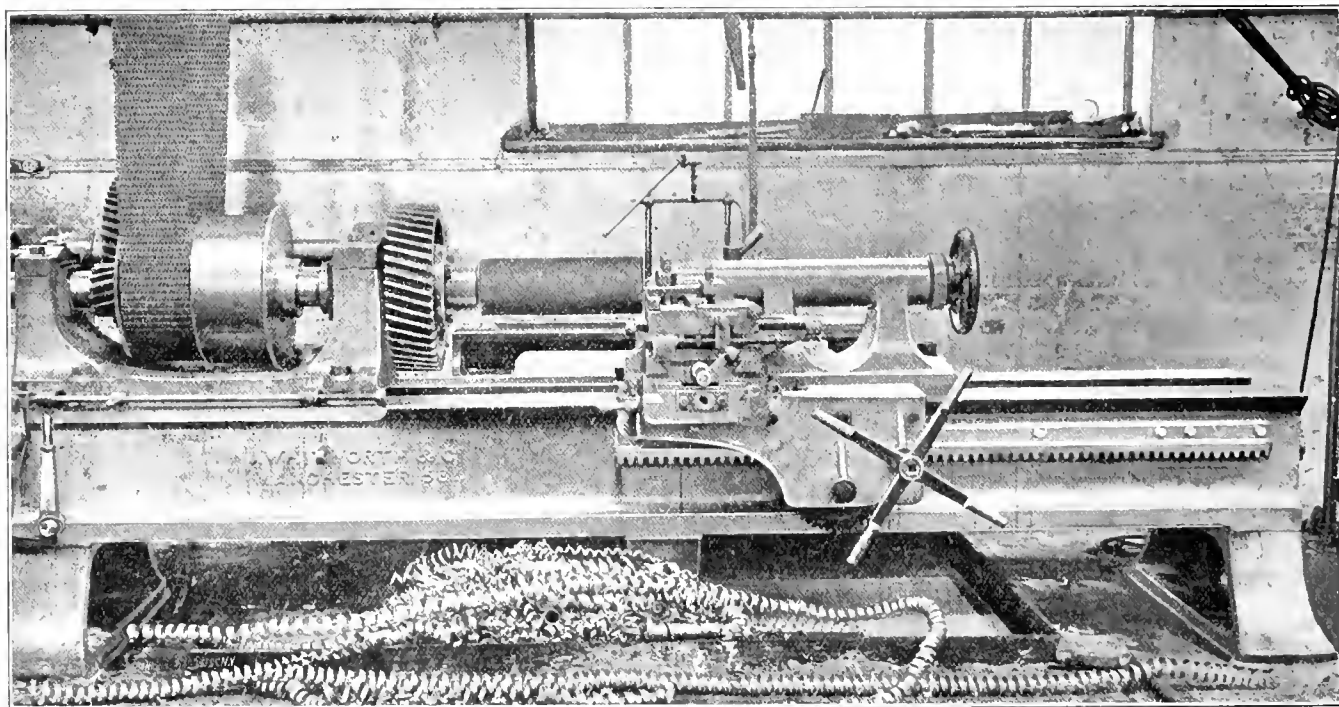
Lathe used for Turning Armor Bolts. Removed 2,480 pounds of Steel Chips in ten hours.
